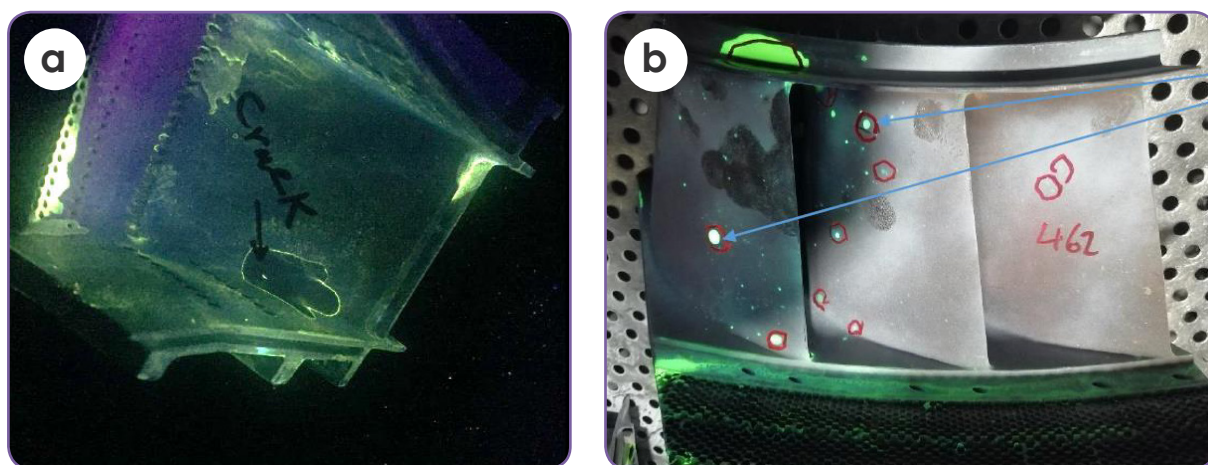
Inspection and defect identification on MGT-30 nozzle vanes by FPI
